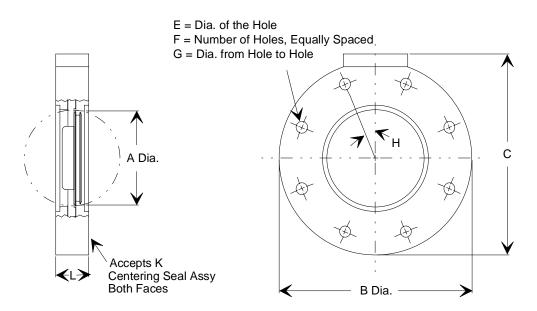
Outline Dimensions of an ISO-NW Series Flange
